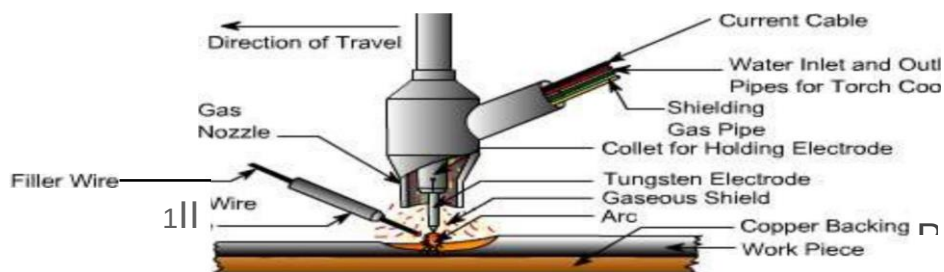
SchematicDiagramofTIGWeldingSystem.IRef:1]
